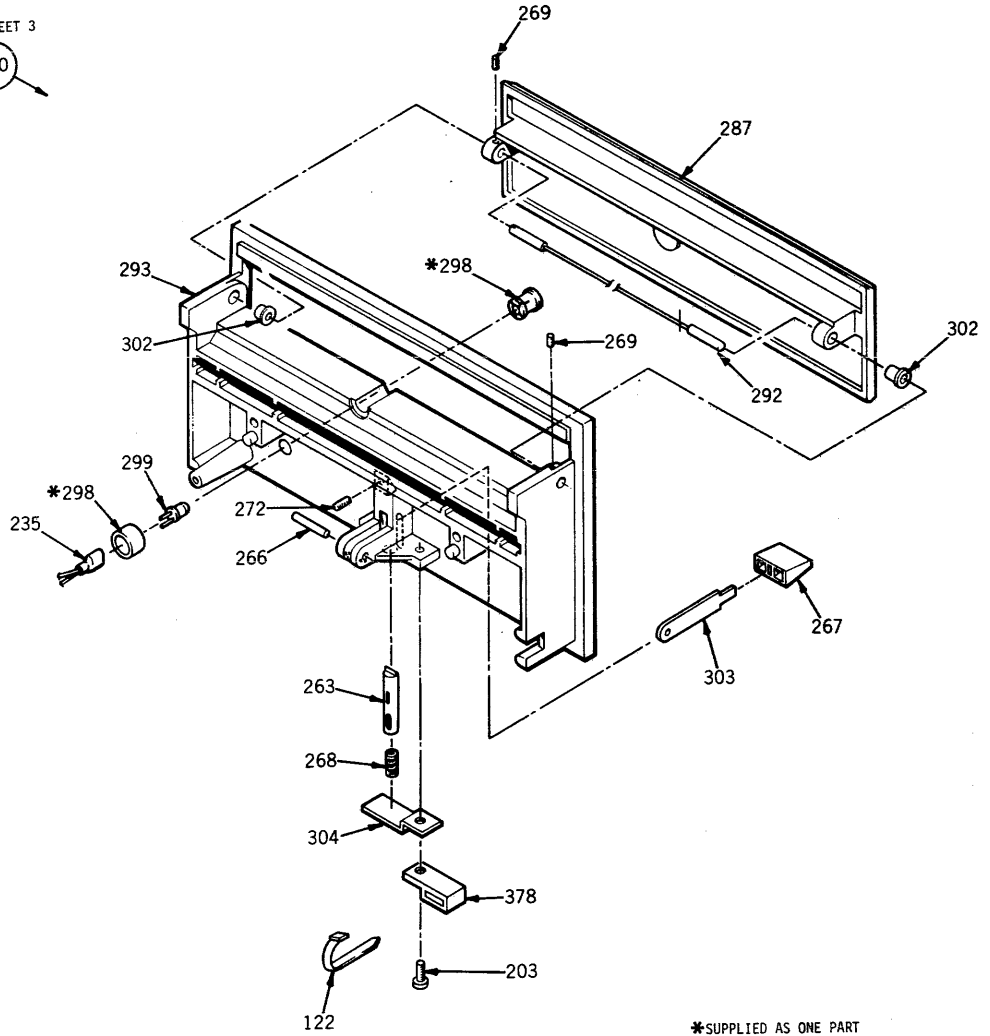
FRONT PANEL ASSEMBLY (SHEET 1 OF 2)
